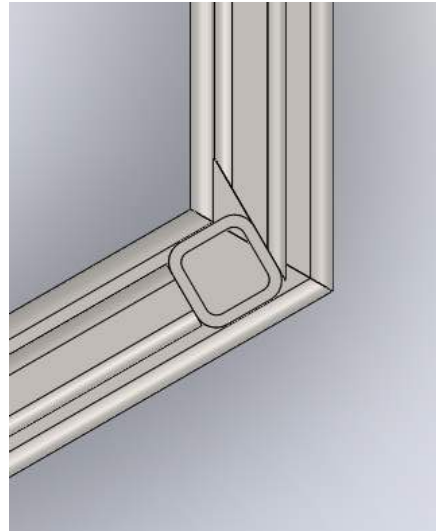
Side supports are perpendicular to the front legs as well while front support is now the only piece cut at a severe angle.
